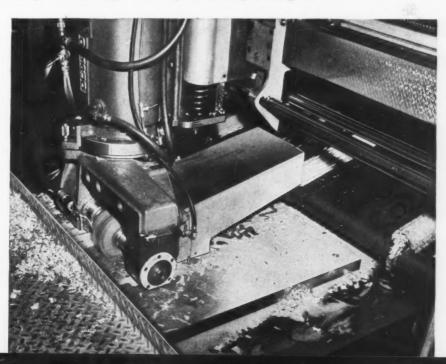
High-tensile aluminum chips, which are produced as fast as 600 cubic inches per minute, are deflected to a multiple-belt conveyor that extends across complete width of machine between housings
